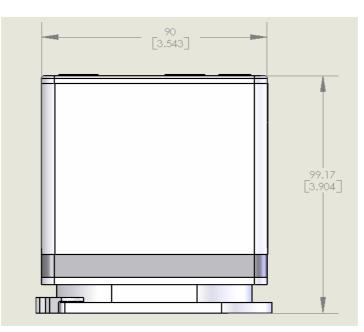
Enclosed Body (Type D) with Split Flange (Type C) - Top View
